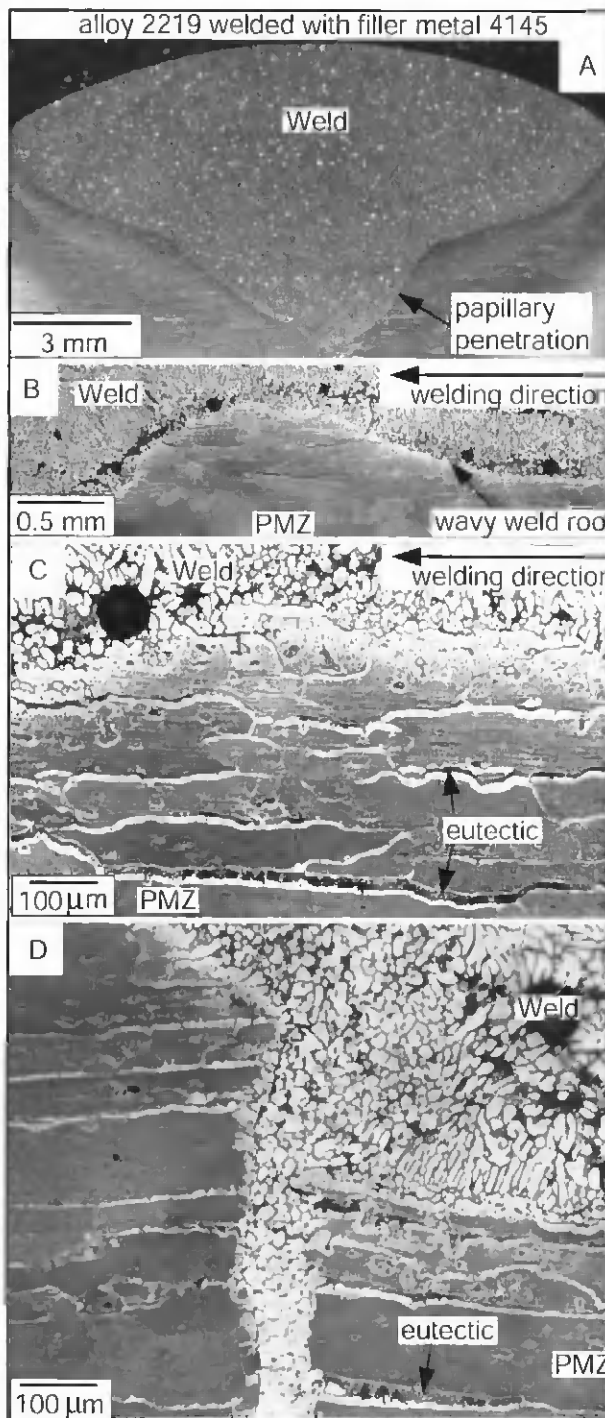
Weld in a butt joint made with filler metal 4145: A — transverse macrograph; B — longitudinal macrograph; C — longitudinal micrograph; D — transverse micrograph.
